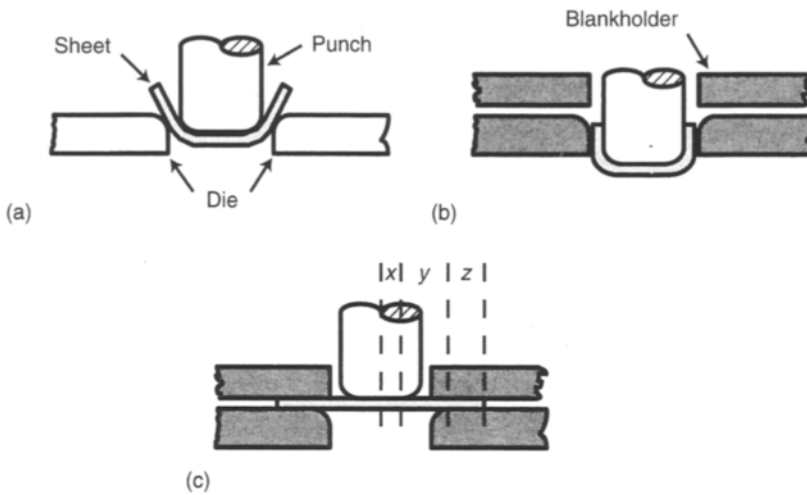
(a) Original deep drawing concept, (b) deep drawing utilizing a blankholder, and (c) deformation zones during deep drawing (see text).
